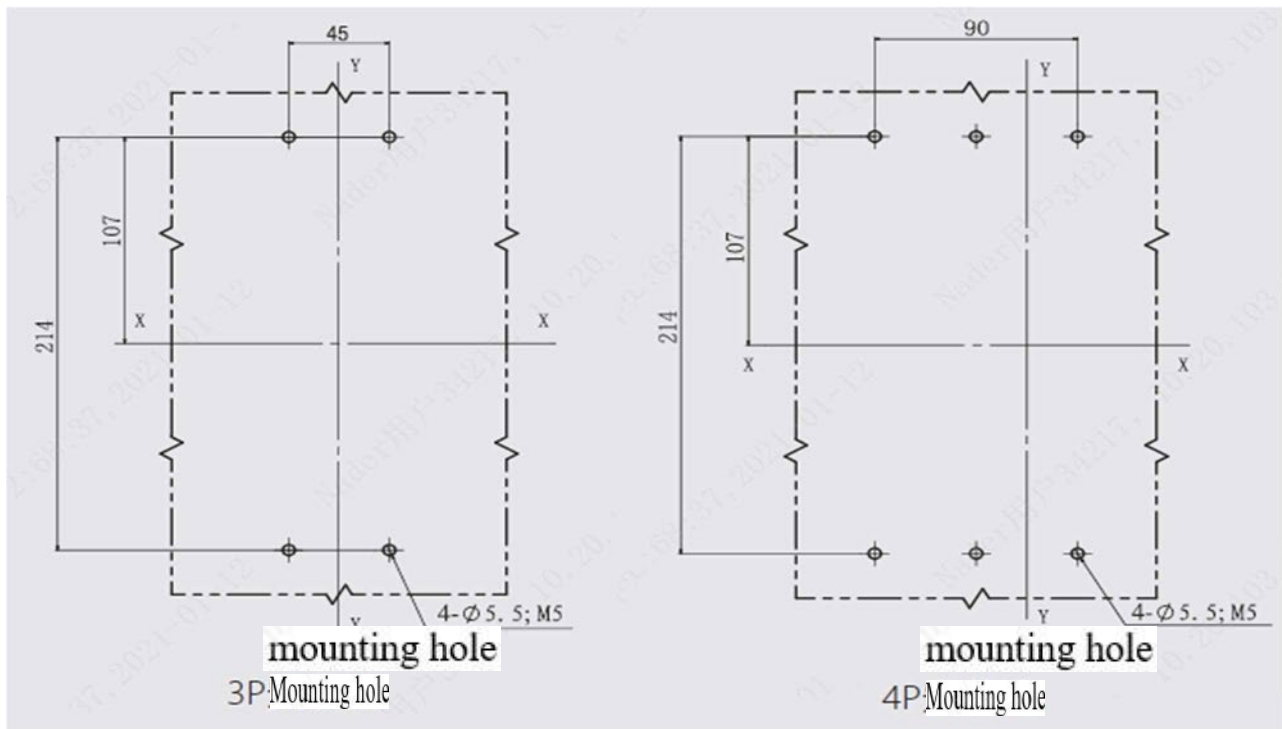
NDM5-250L/M/H 2P 3P 4P Lnstallation dimension drawing of front board wiring products
